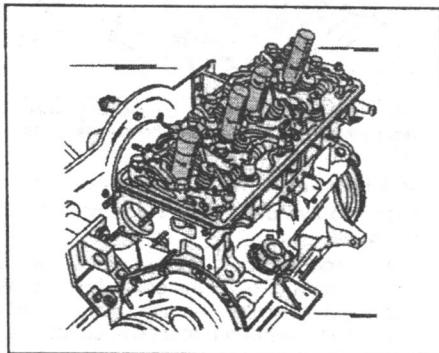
View of the cylinder head after removal of the cylinder head cover.
